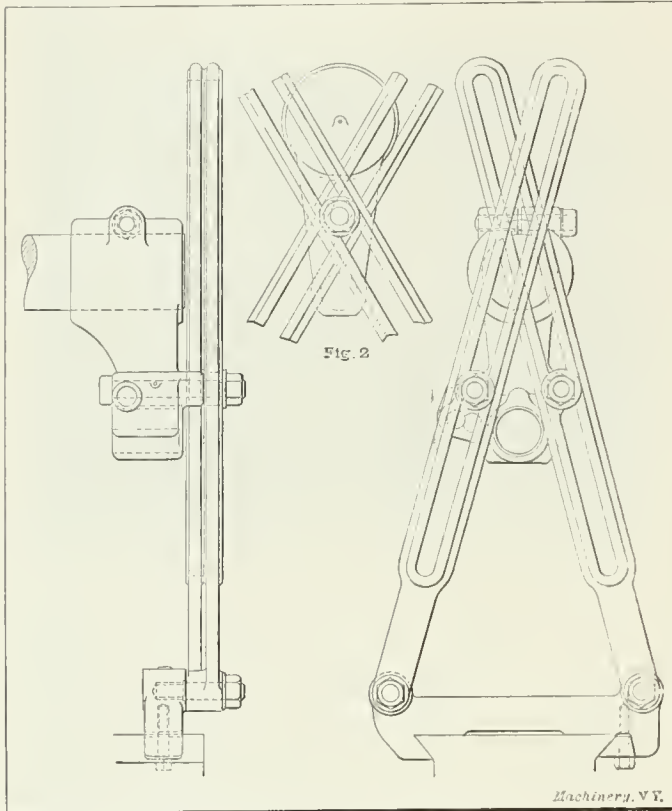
Slotted Braces used on Brown & Sharpe Light Milling Machines.
